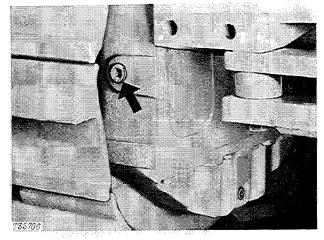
Final Drive Oil Level Check Plug (Without Rear Mounted Equipment)
